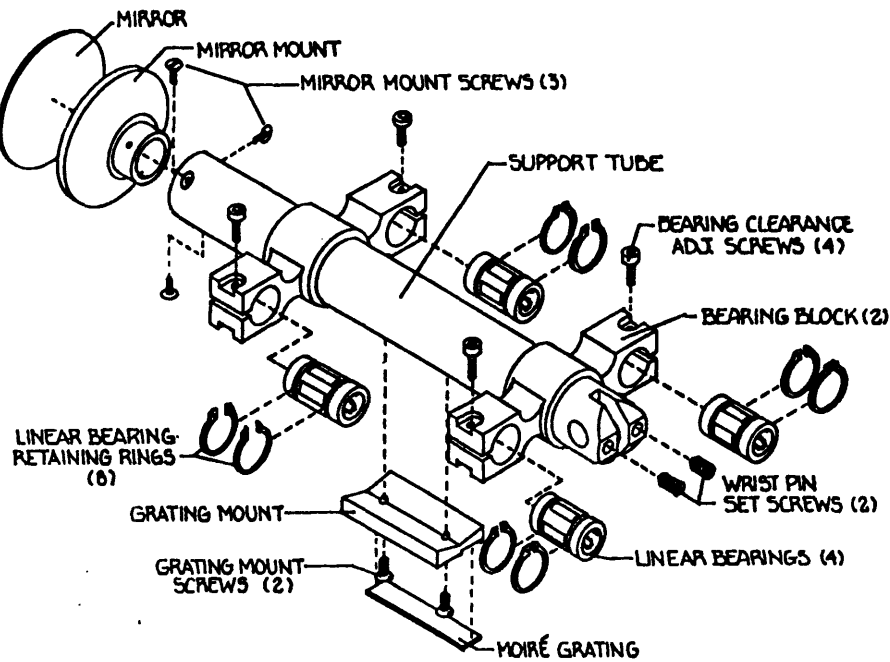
An exploded view showing the components of the optical carriage.
